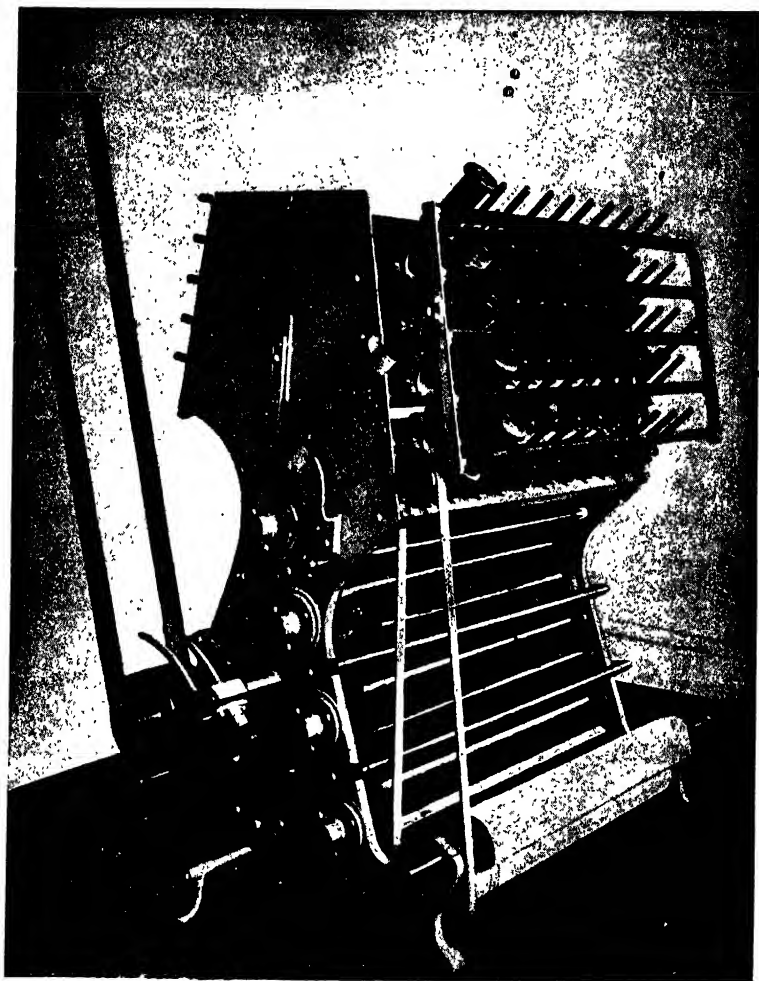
Bobbin-to-bobbin thread polishing machine.
